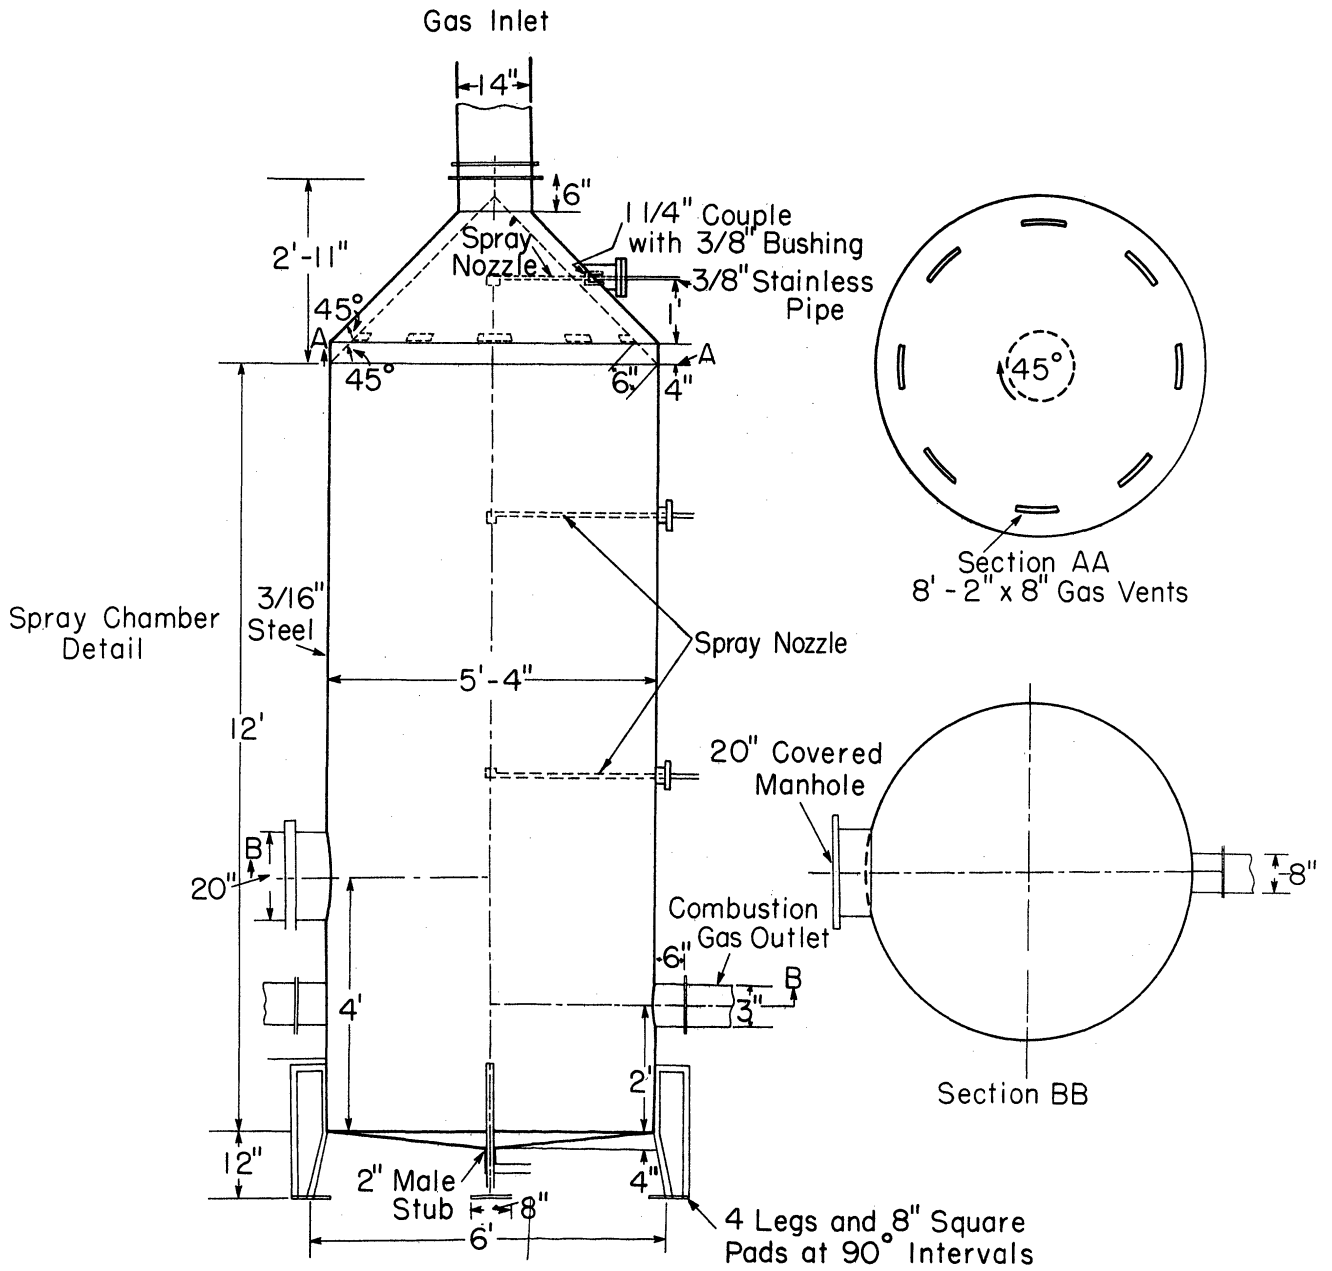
Detailed drawing for the chamber of the fish stickwater concentrator.
